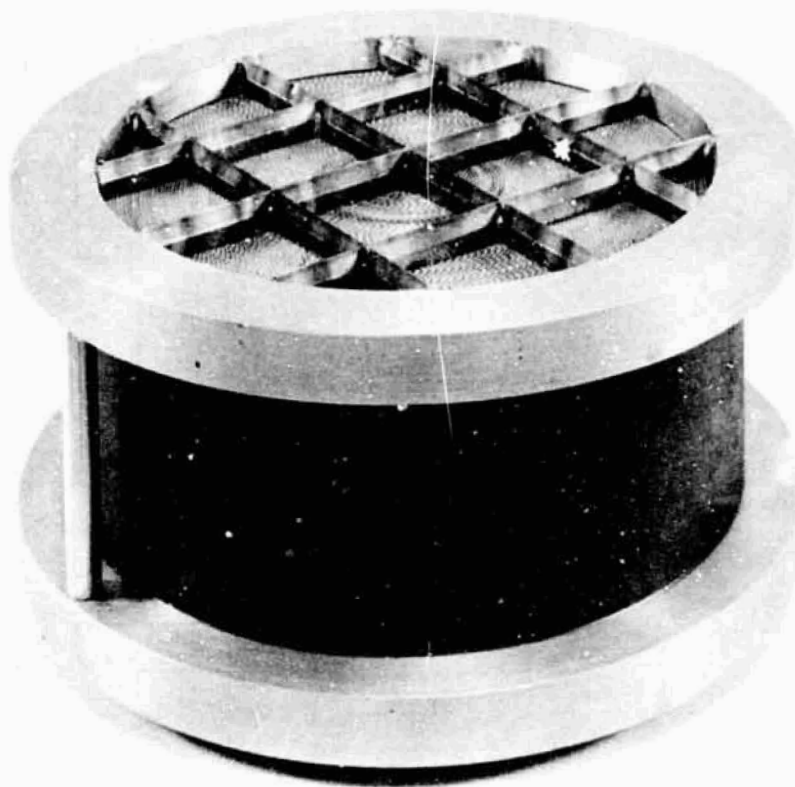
Shand and Jurs Spiral-Wound, Crimped Aluminum Ribbon Arrester Assembly
